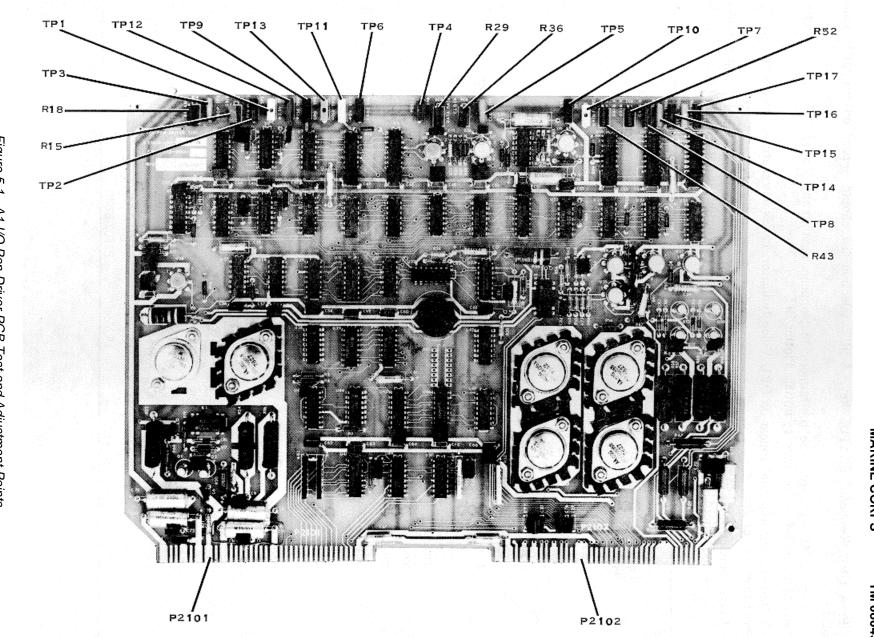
A1 I/O Pen Driver PCB Test and Adjustment Points
